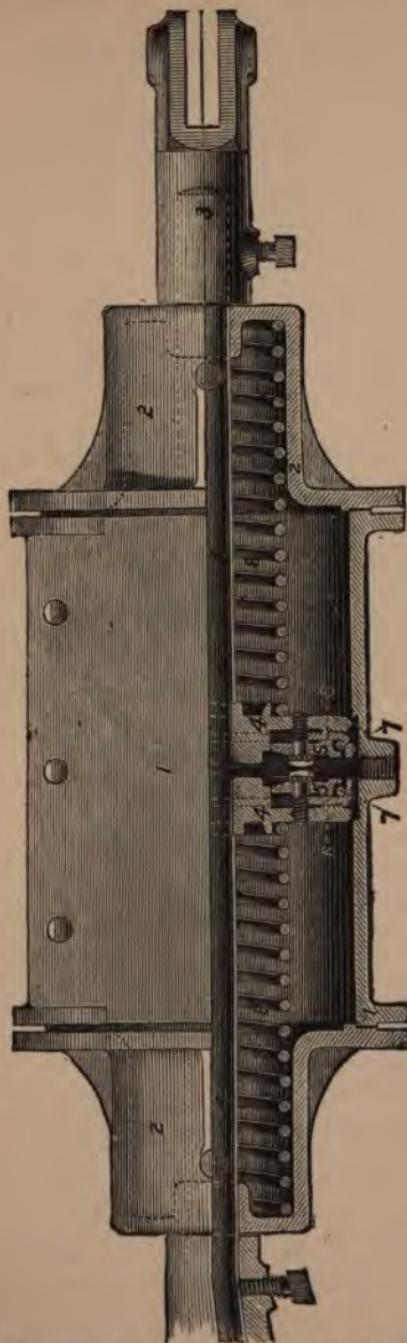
8-inch Double-Piston Brake-Cylinder.
